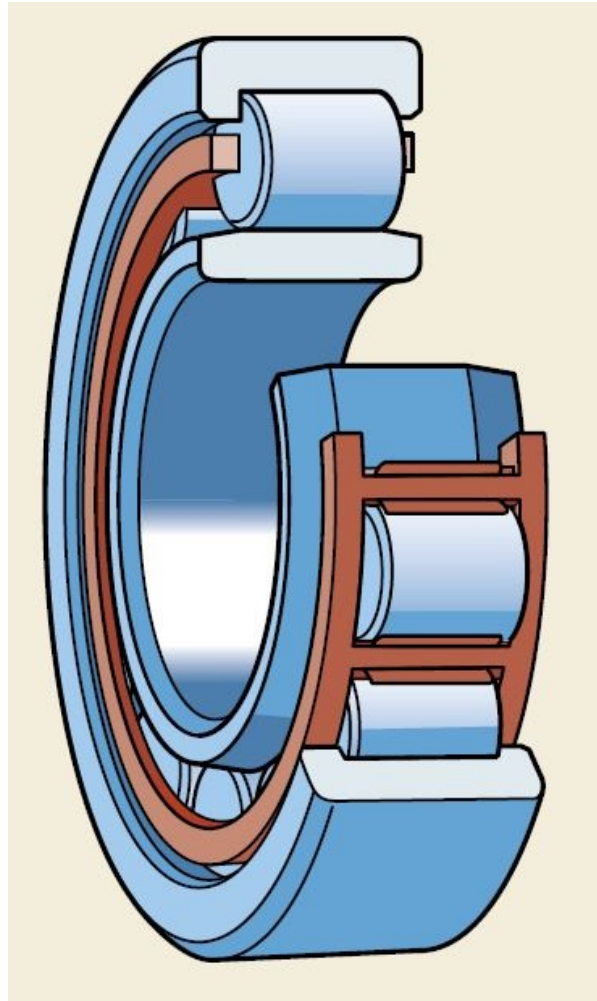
Single Row Cylindrical Roller Bearing (NU design) [2]
